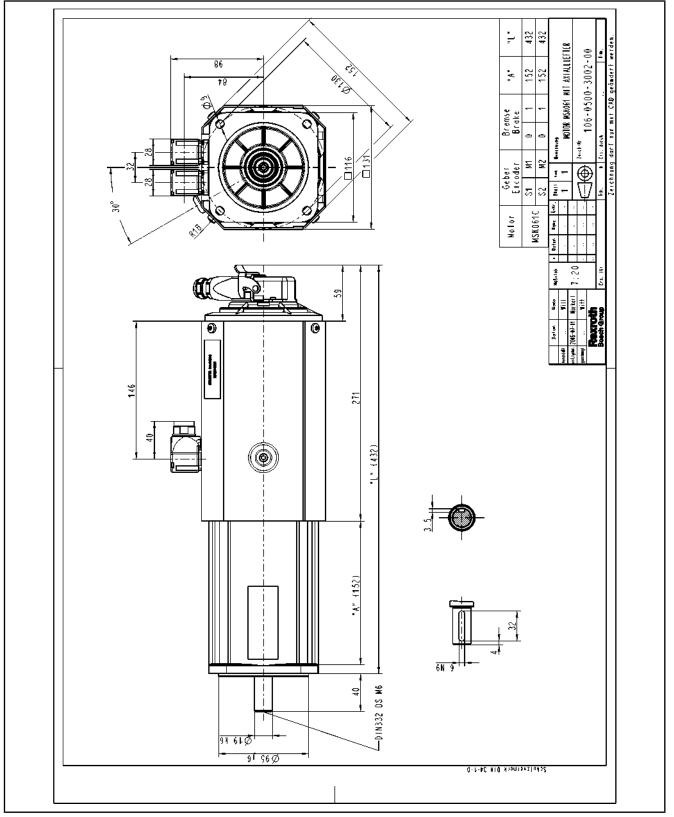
Dimension sheet MSK061 with axial fan unit
